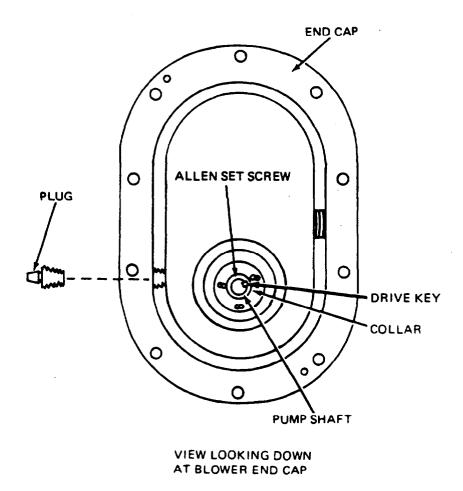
Remove/Install Fuel Pump From Blower End Cap.
